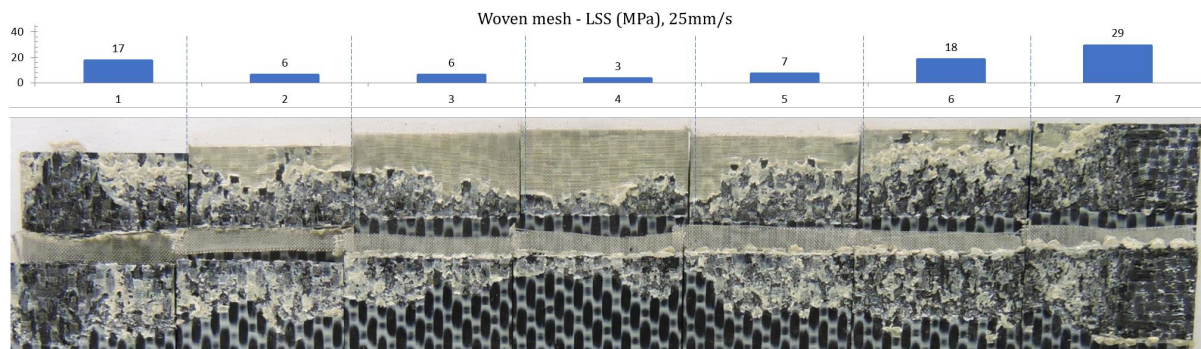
The fracture surfaces at a welding speed of 25mm/s
